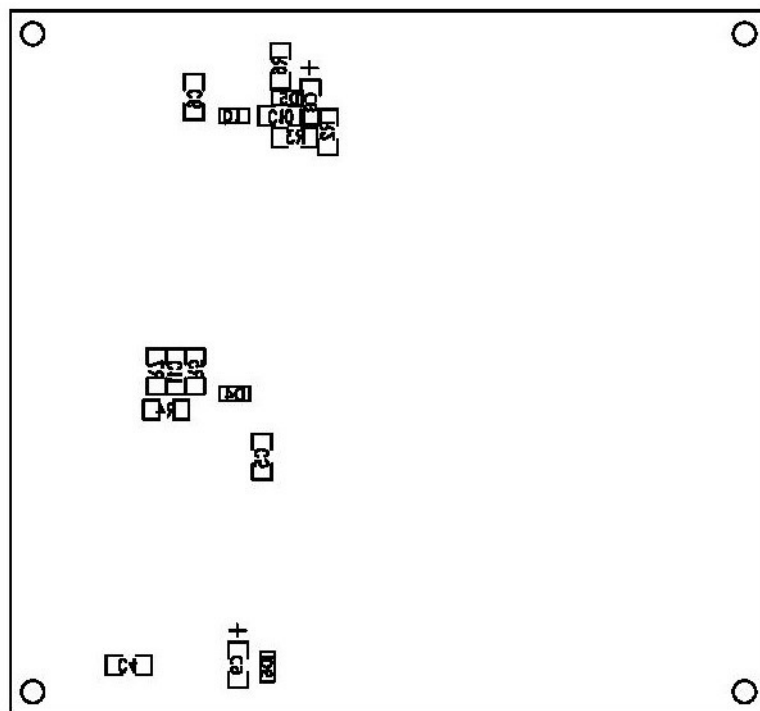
Miniature MOSFET Gate Control Board Assembly diagram Bottom.
